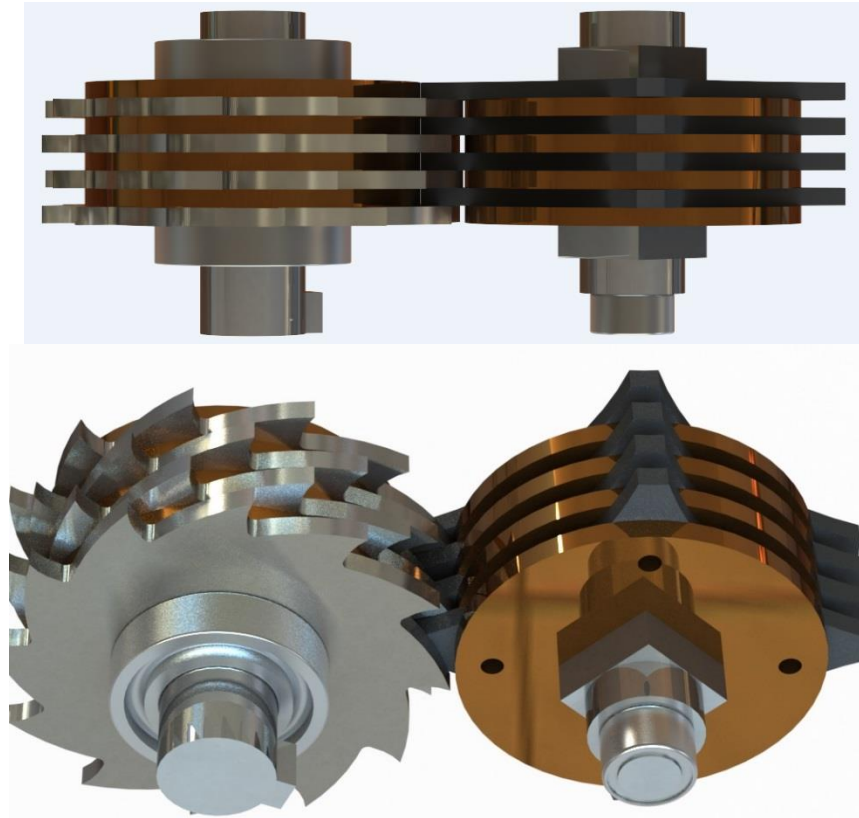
Needle cutter. Left: rotating cutters separated by spacers; Right: stationary cutters separated by spacers.
